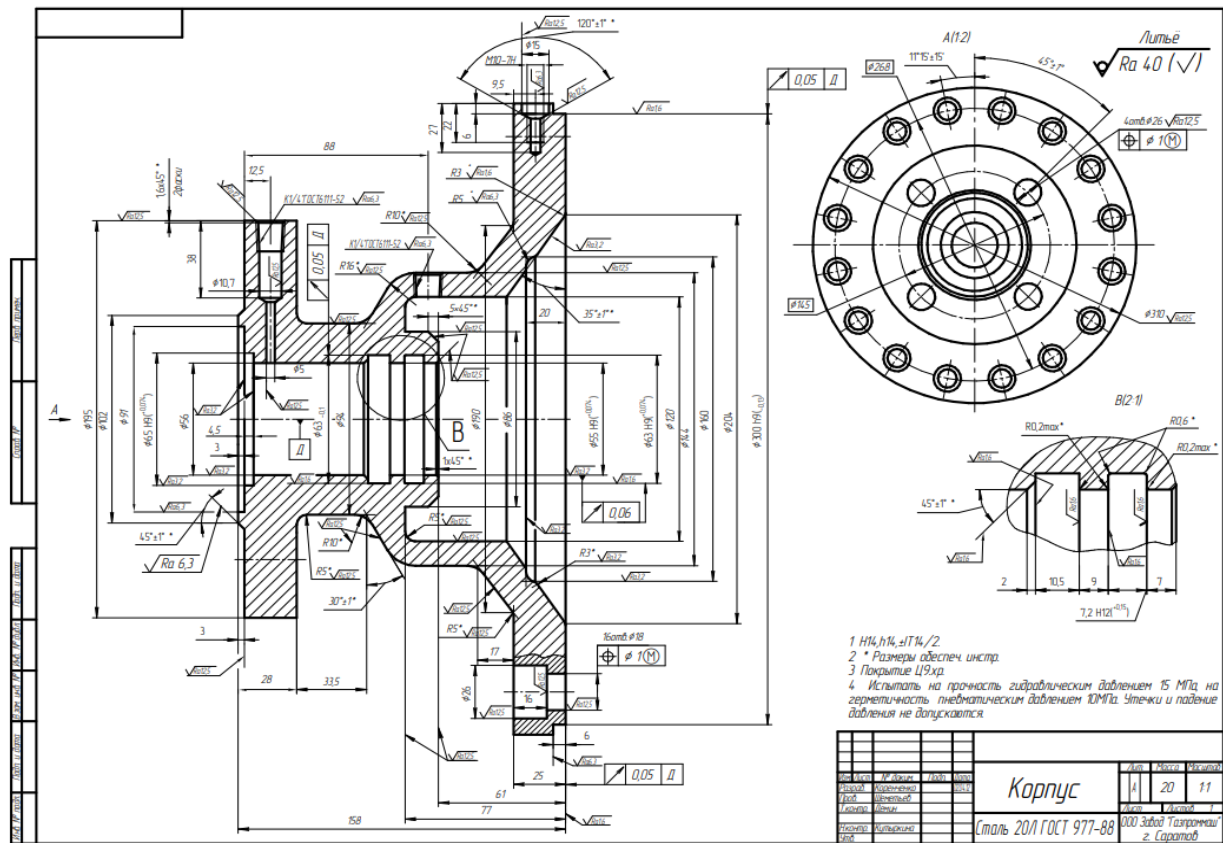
Examples of design drawings of machined parts (“GAZPROMMASH” LLC) (part 1)
